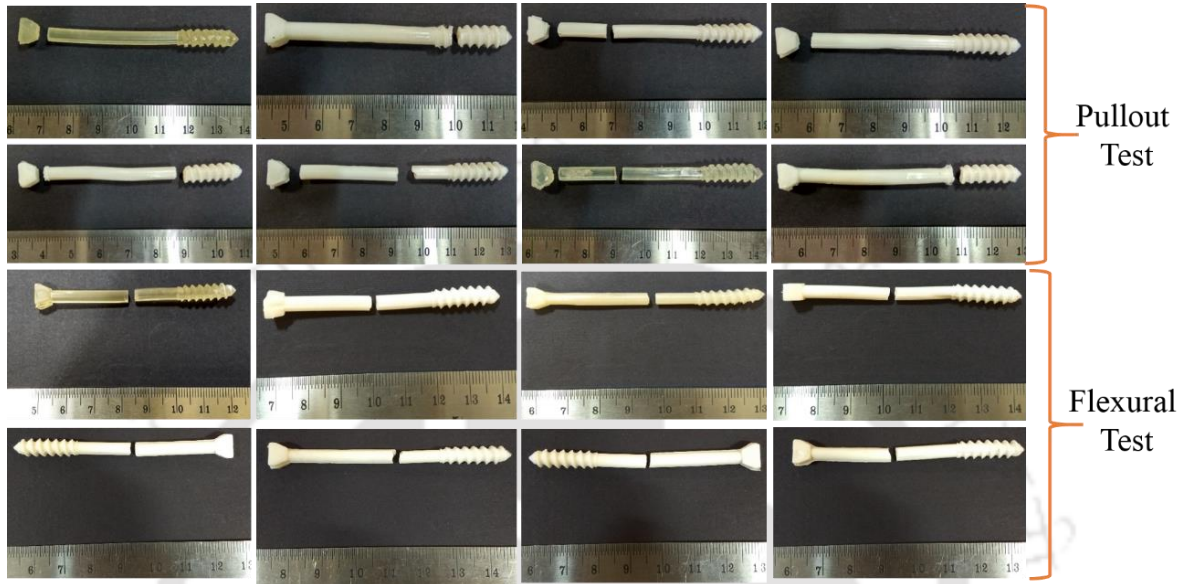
Photographic images of fractured cancellous screws after the pull-out test and flexural test.
